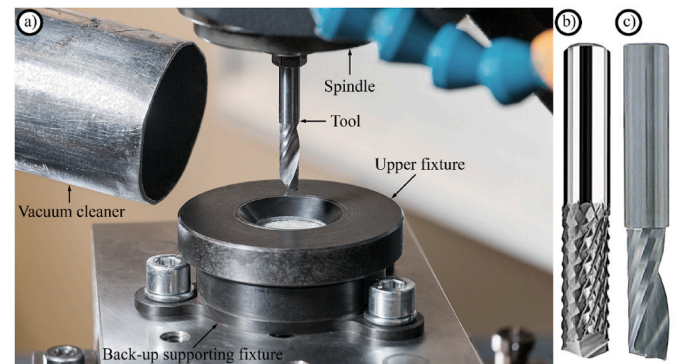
Experimental setup: (a) drilling environment (b) uncoated carbide drill (c) uncoated single flute carbide end mill.
